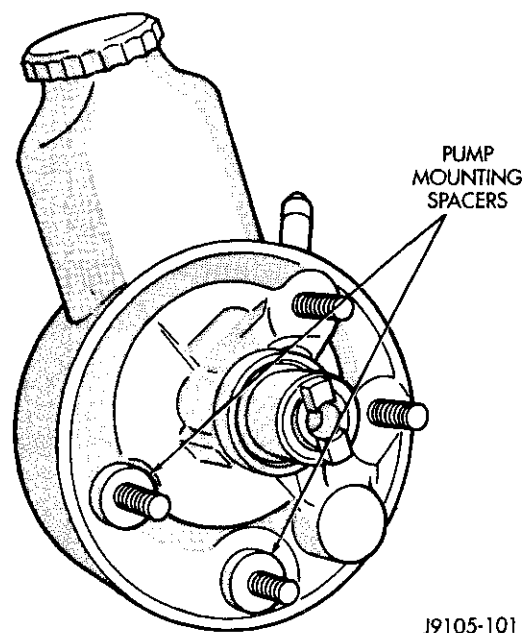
Steering Pump Mounting Stud Spacer Locations
